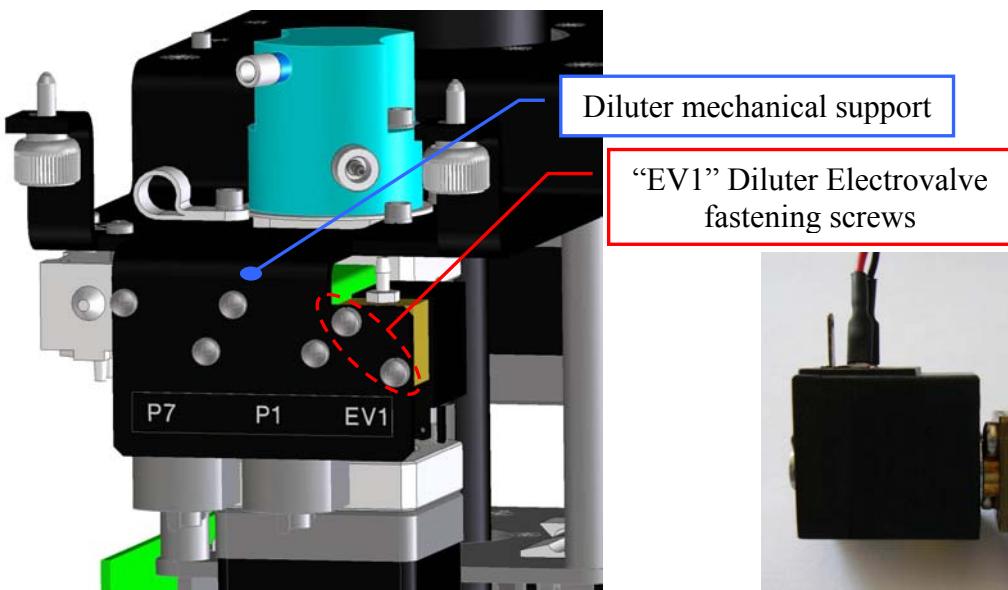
“EV1” Diluter Electrovalve fastening screws
